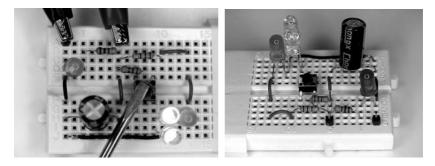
Assembly of the bread board and b) detail of the assembly (a picture taken from the other side)
